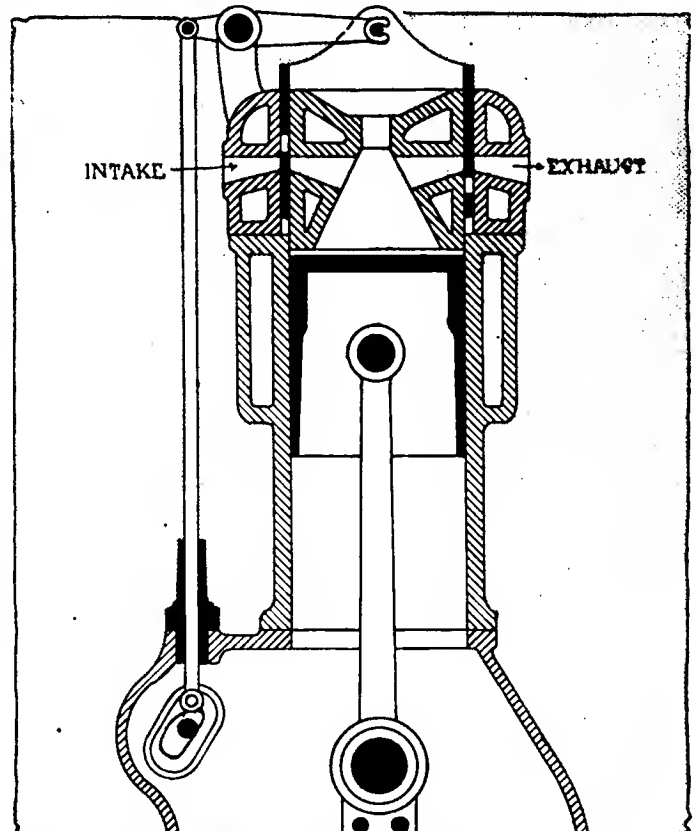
Cam-operated overhead sleeve-valve of Diehl motor
